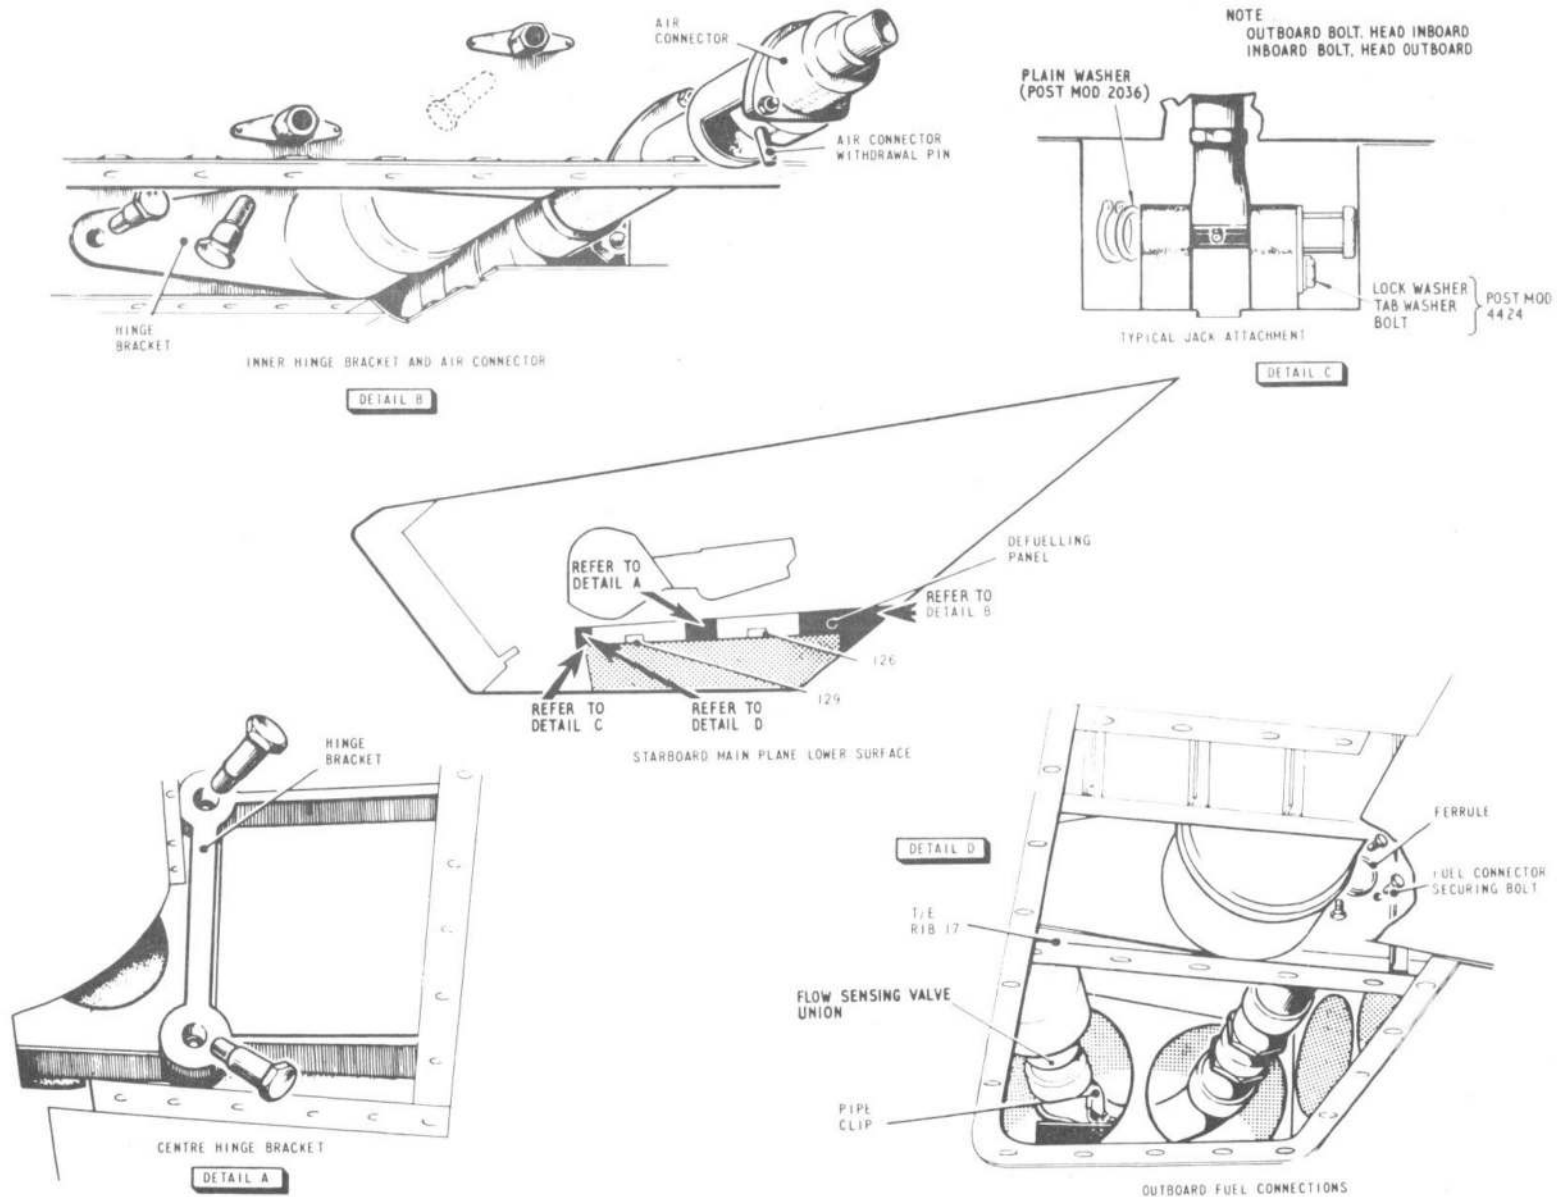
FLAP - REMOVAL AND ASSEMBLY
